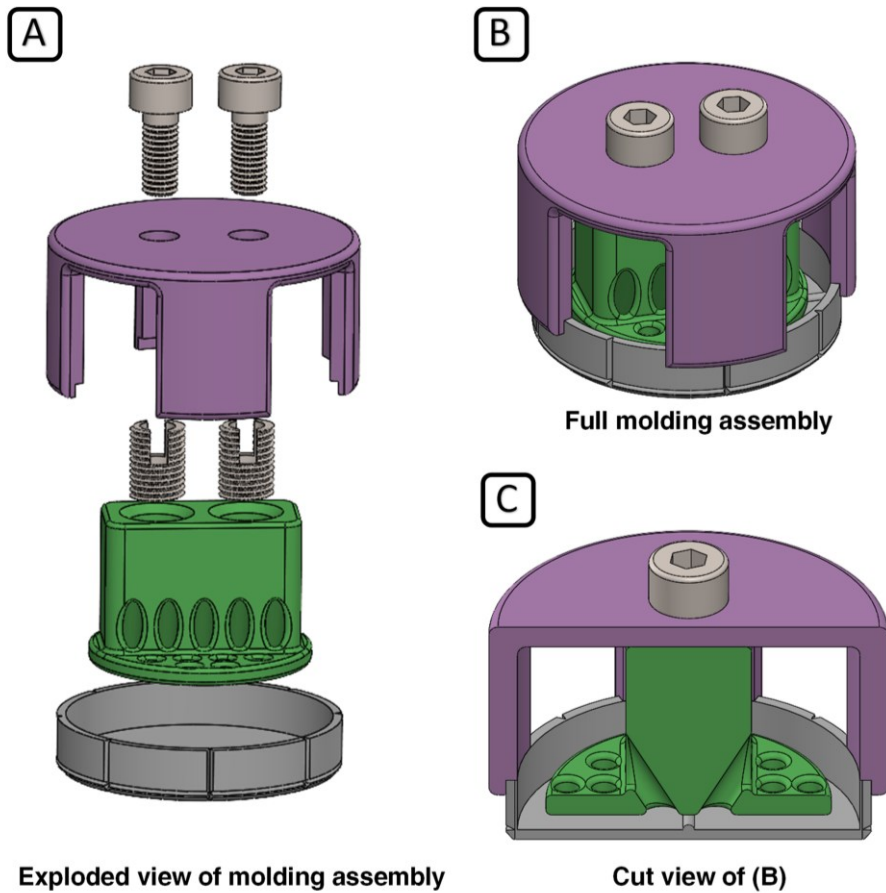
8K build platform molding assembly. Detailed exploded view of the build platform modified for the Phrozen Sonic Mini 8K printer (A), the complete molding assembly (B), and section view of “B” (C) including the positions of the thread inserts and screws.
